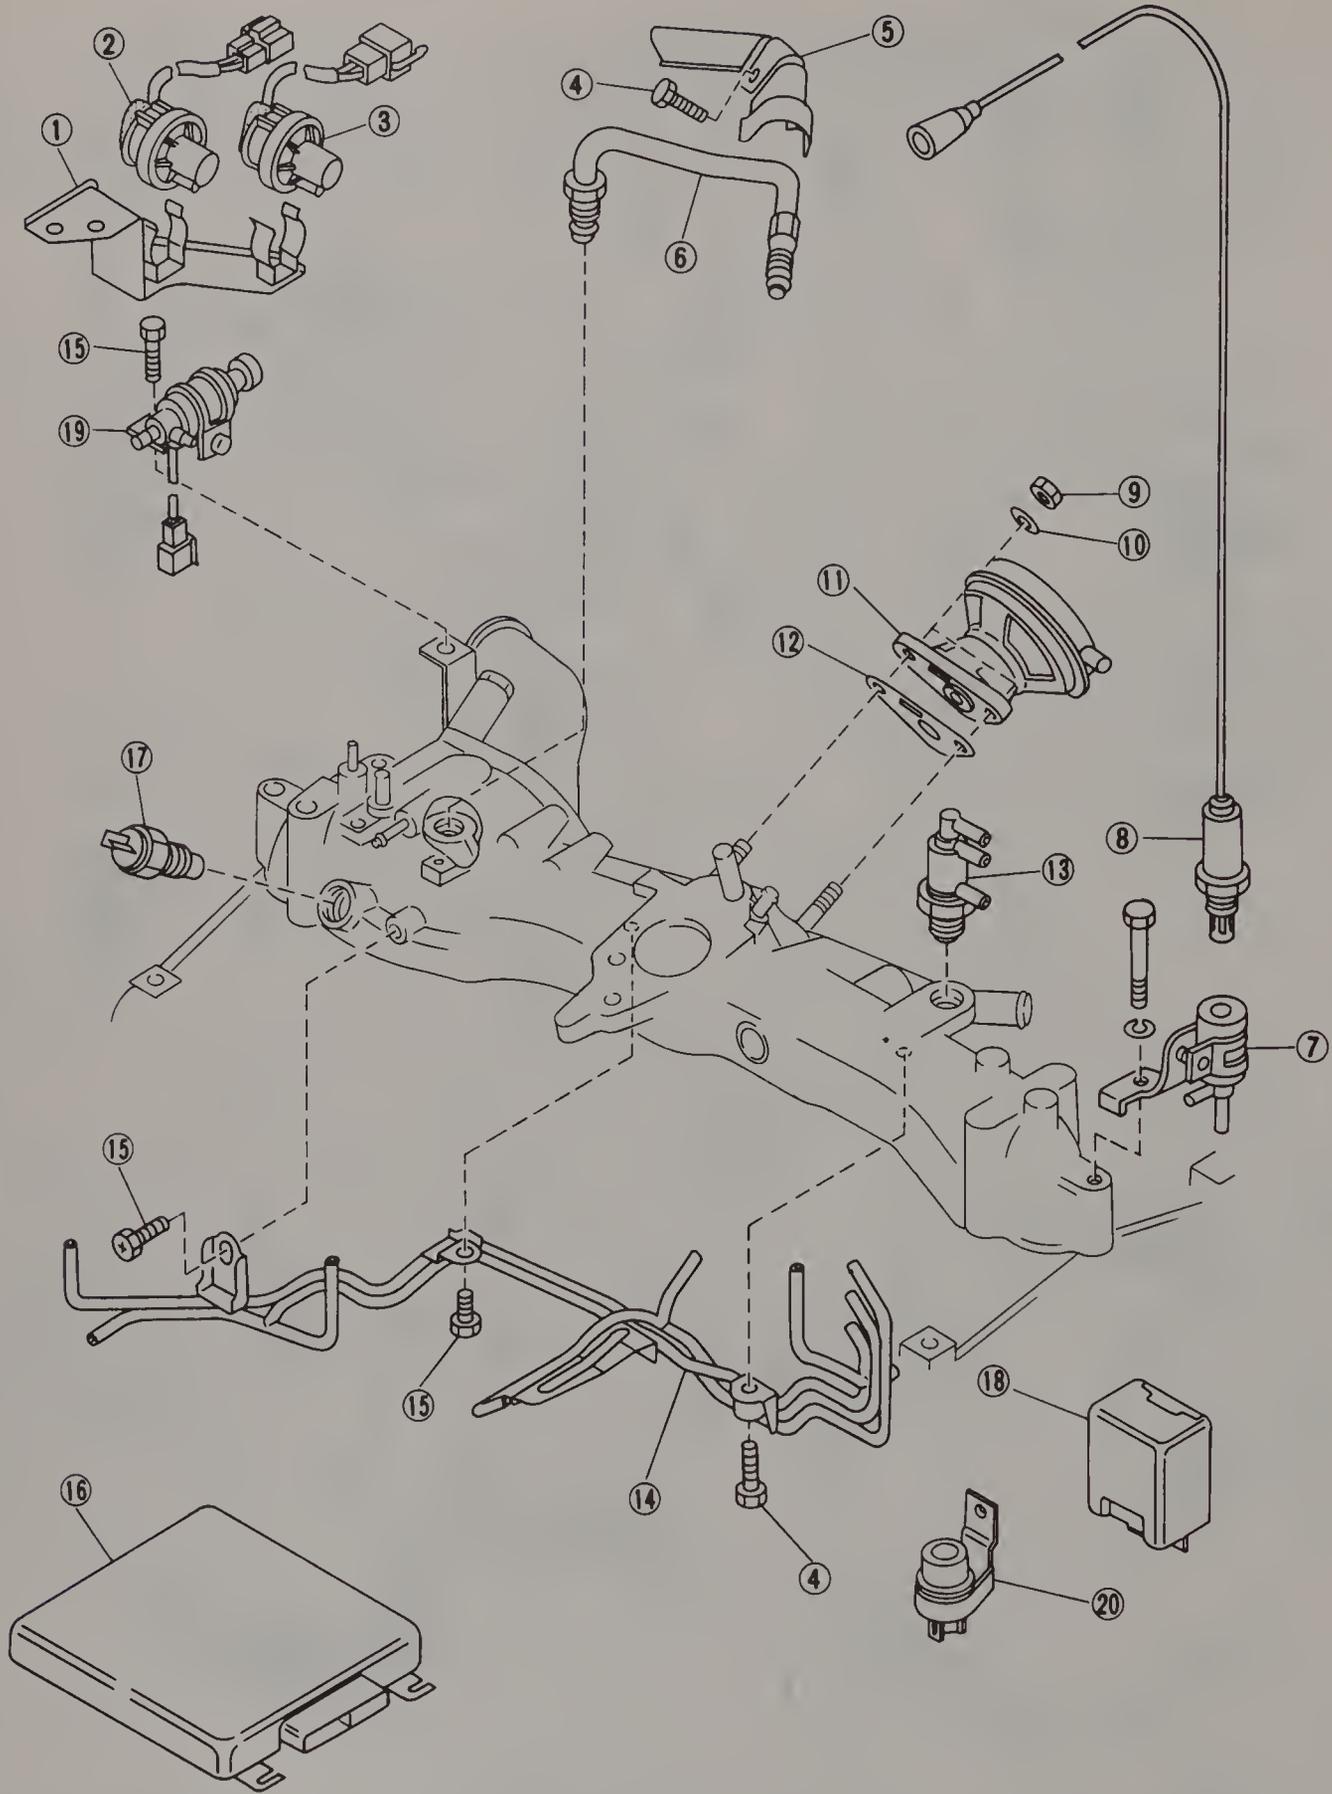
Emissions control components for vehicles with Carter/Weber carburetors – exploded view (typical – 1983 shown)
